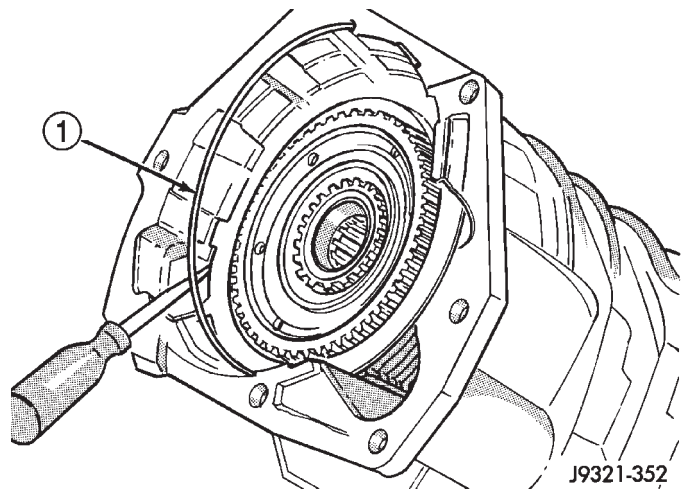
Removing Overdrive Clutch Pack Retaining Ring
